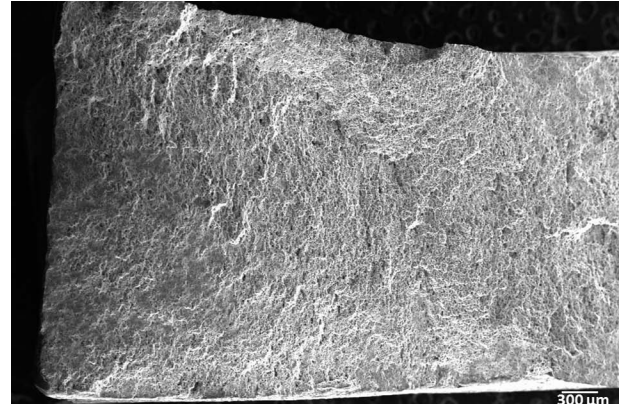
Fracture surface of a room temperature tensile-tested AA 5456 specimen taken at low magnification
